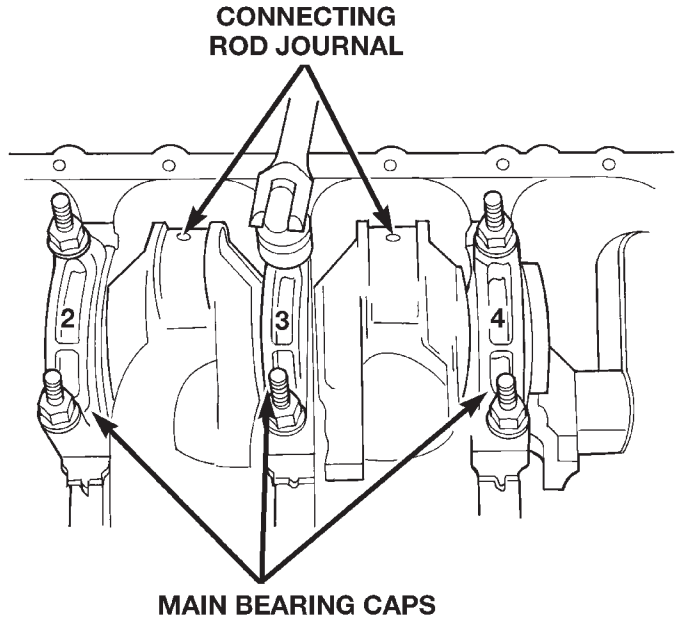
Removing Main Bearing Caps and Lower Inserts
